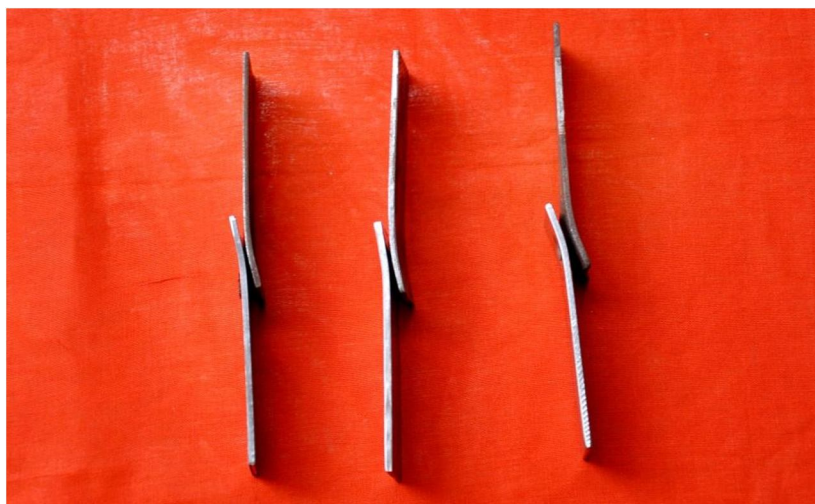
Photographic image of TSFL tested samples of AIS5052 –AIS5052 similar welded joints after testing.
